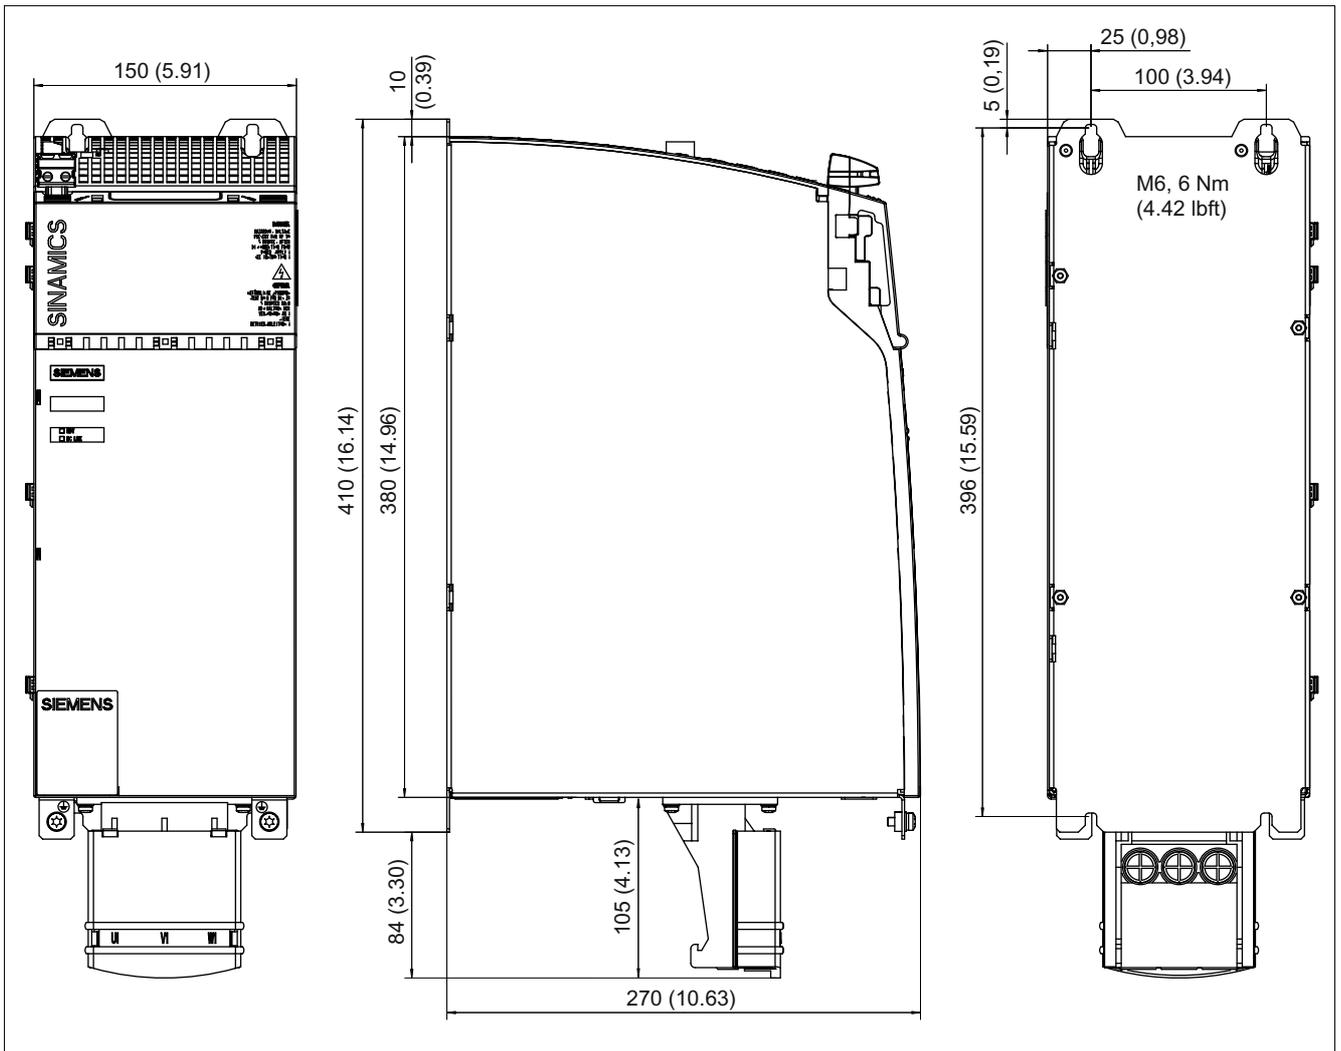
Dimension drawing of Smart Line Module with internal air cooling (36 kW), all dimensions in mm and (inches)
